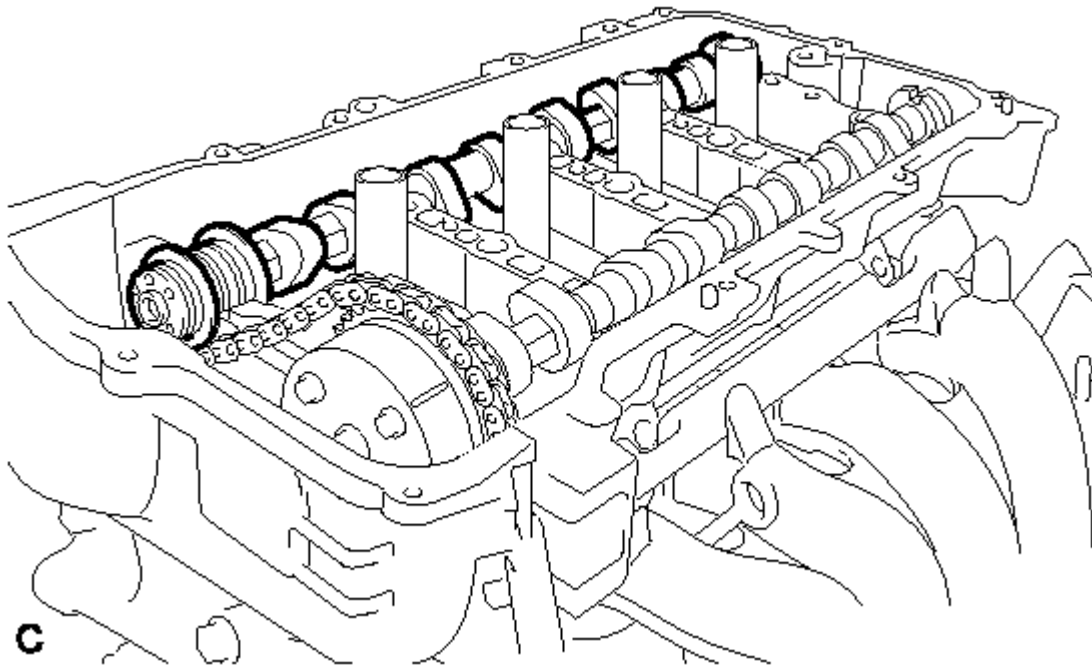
View Of No. 2 Camshaft From Camshaft Housing
